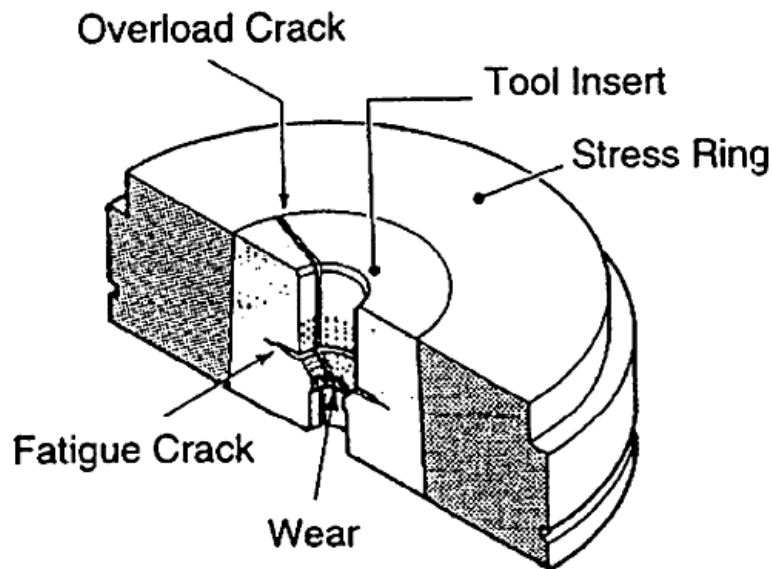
Tool Failure in Cold Extrusion die [55].
